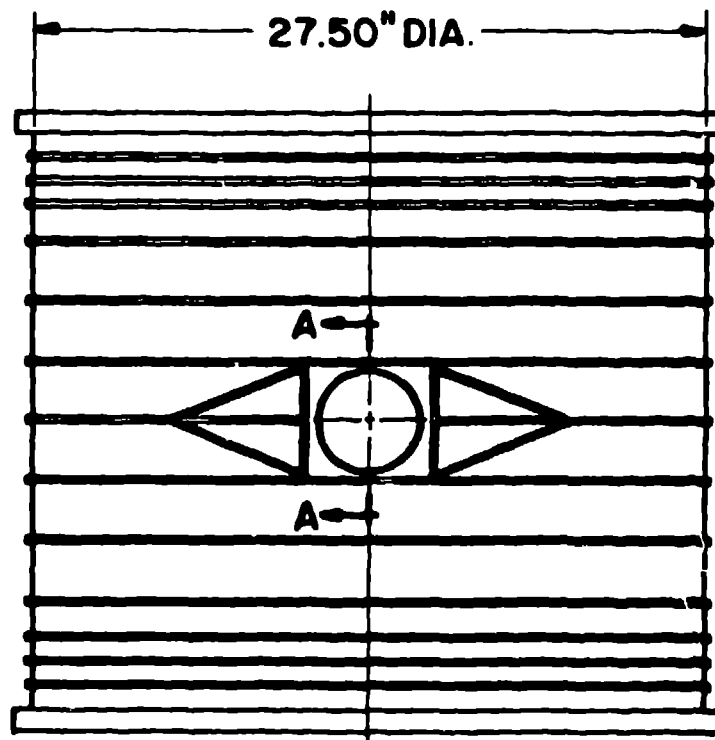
Framing and construction plans for a test cylinder that has two interrupted rings.
